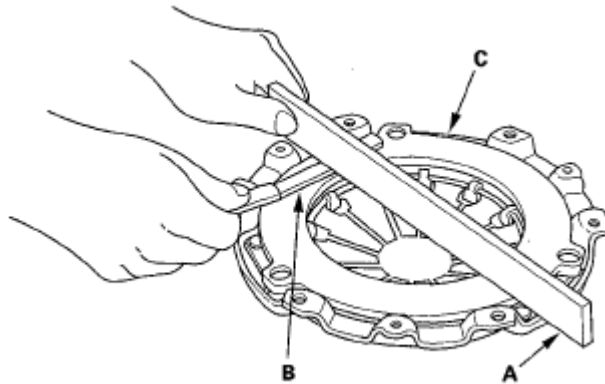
Inspecting Warpage Straight Edge And Feeler Gauge
